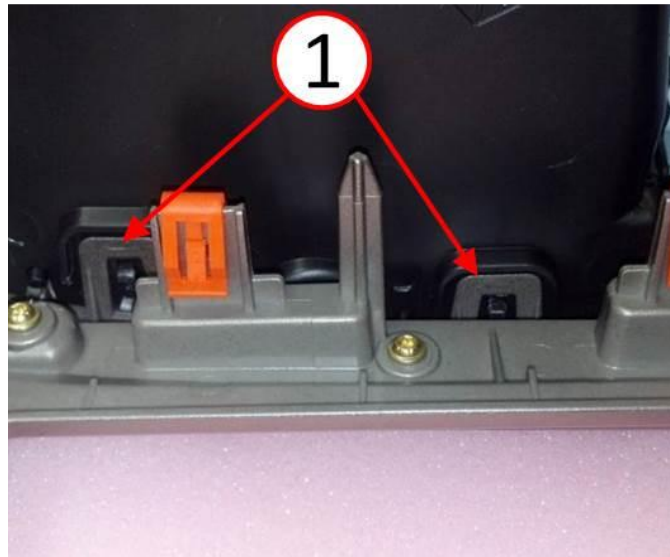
HVAC Outlet Inner Side Edge Attachment
